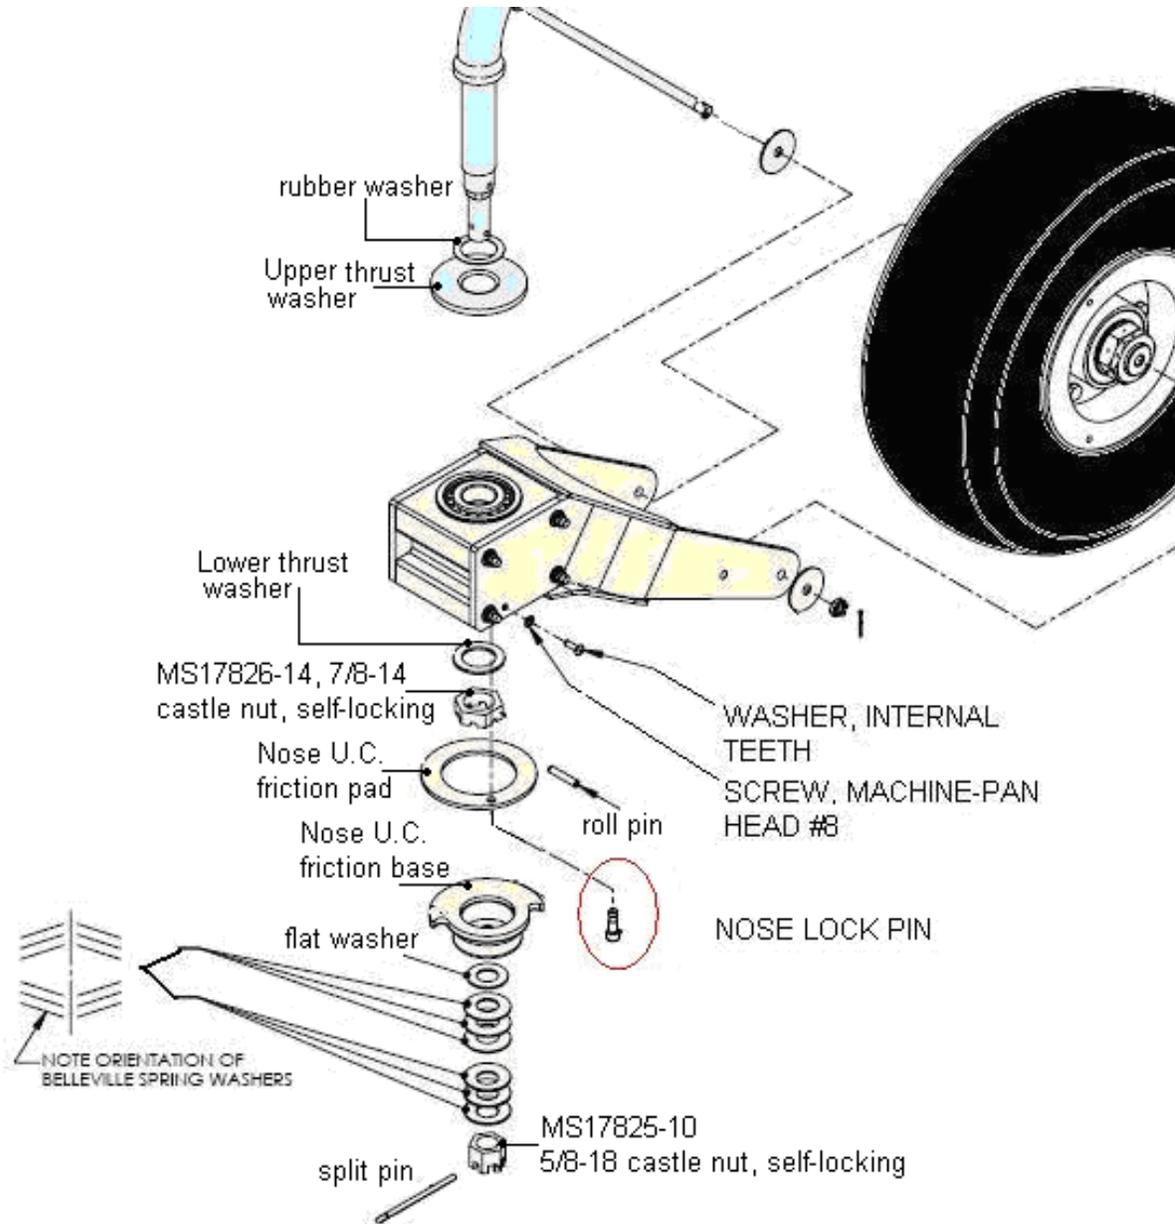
Exploded View of Nose Wheel Steering Assembly
